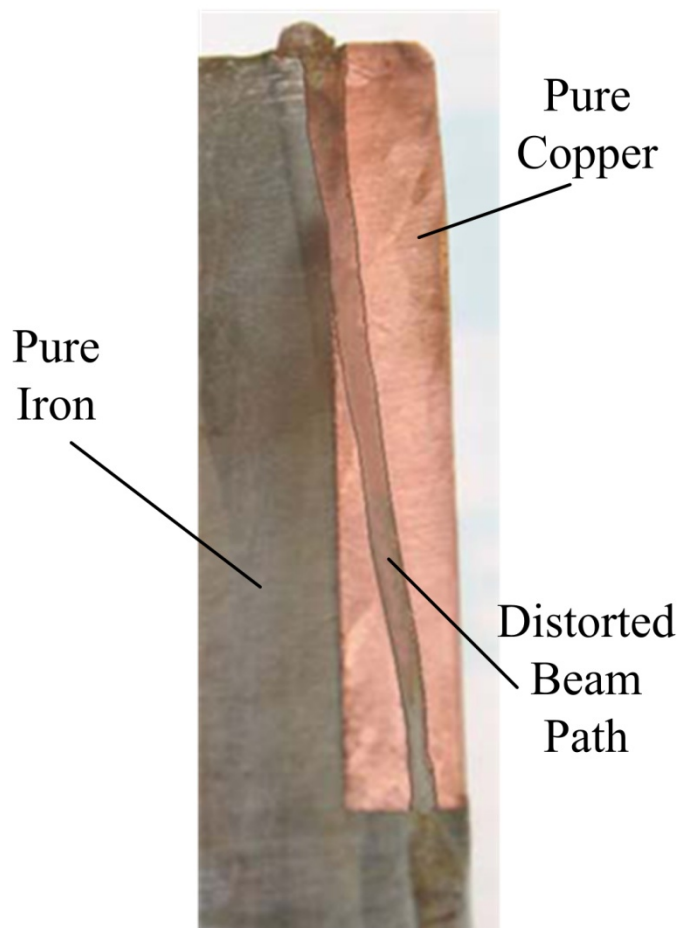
Dissimilar electron beam weld deflected by magnetic fields [51].
